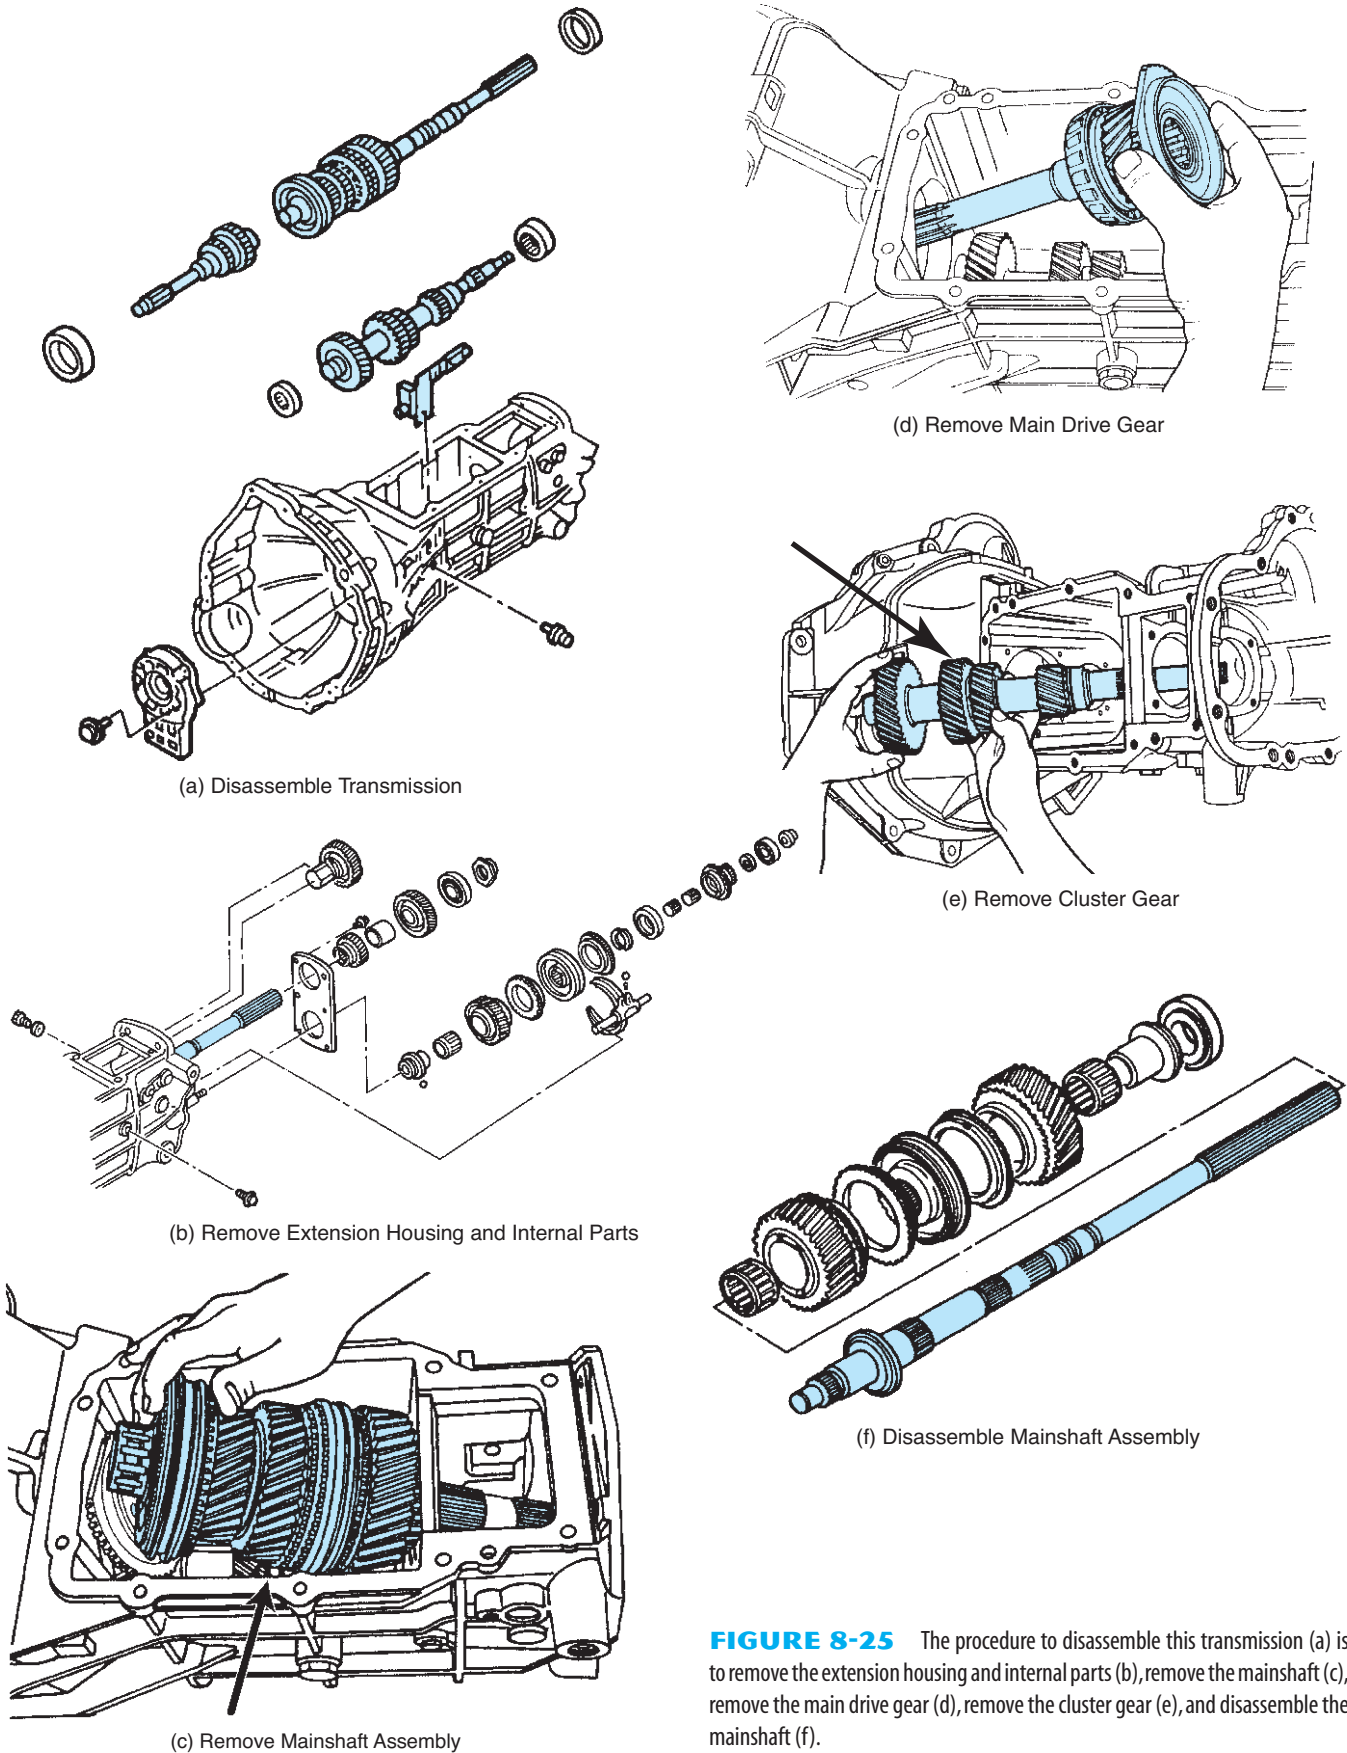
The procedure to disassemble this transmission (a) is to remove the extension housing and internal parts (b), remove the mainshaft (c), remove the main drive gear (d), remove the cluster gear (e), and disassemble the mainshaft (f).
